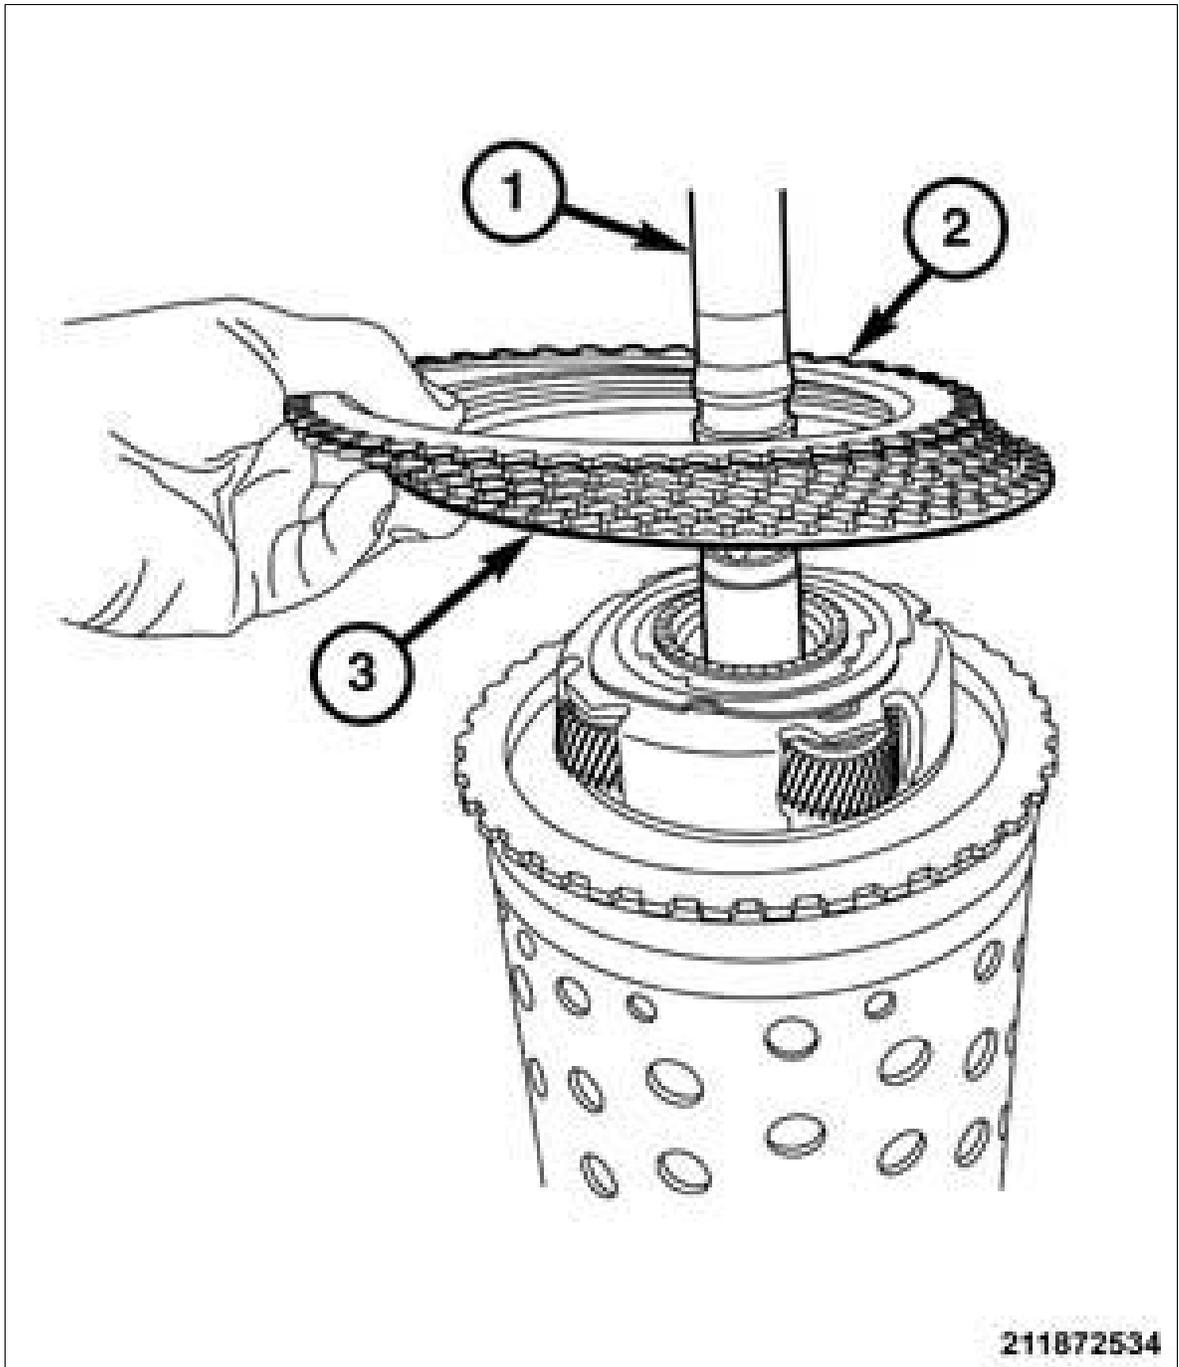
Annulus Assembly & B-Clutch Wave Plate
